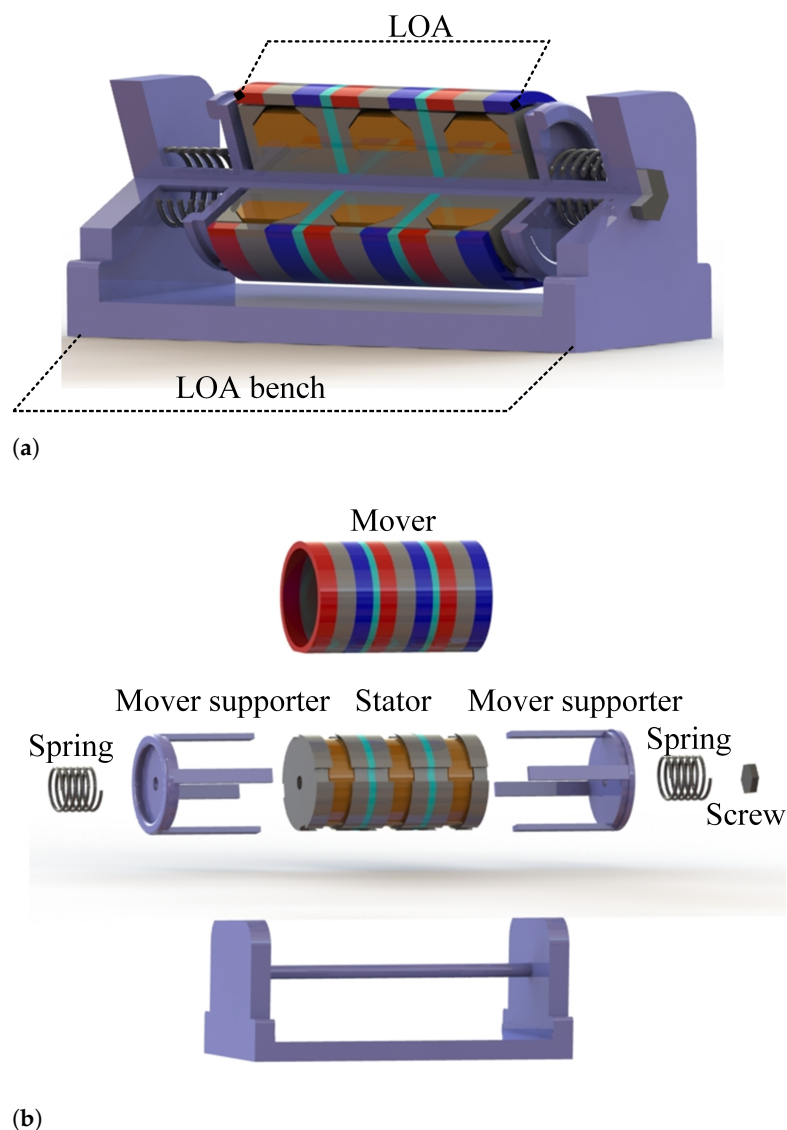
(a) Full assembly of the proposed TMM-LOA; and (b) exploded View.
